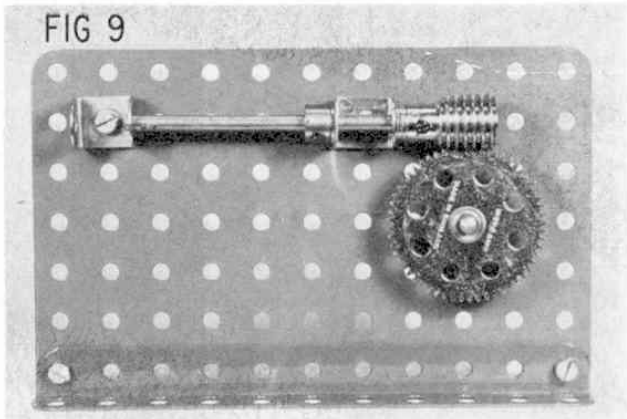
A Worm drive, considered to be the final development of a helical drive.
